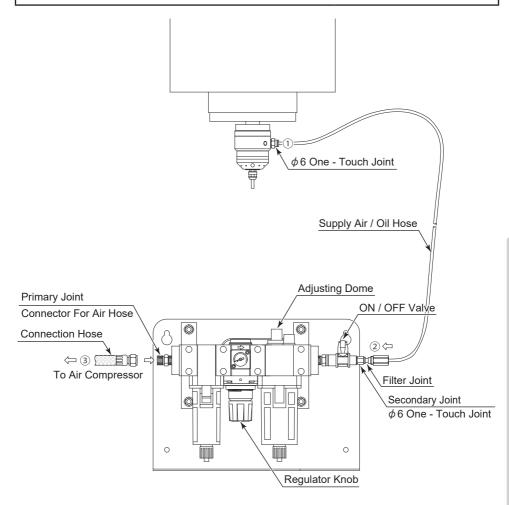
Connection of Air Line Kit " AL - M1202 (Sold Separately) "
